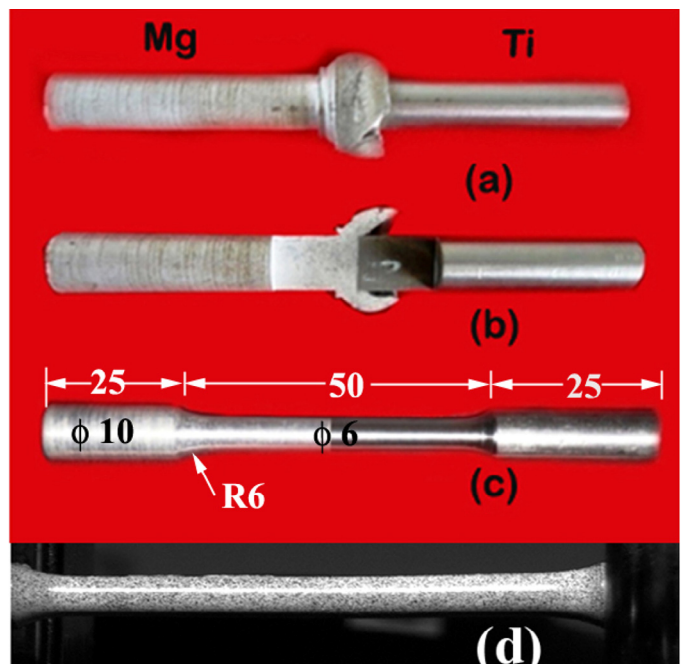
(a) Mg–Ti Joints, (b) Mg–Ti Joints (cross sectional view), (c) photographs of tensile specimens before testing (d) specimen prepared for DIC test.
